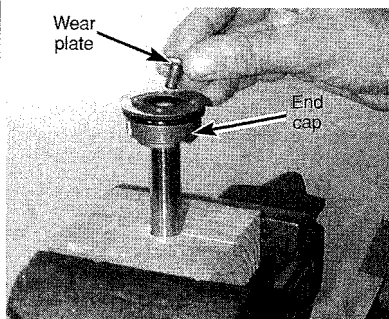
Slide the end cap onto the trim rod and thread the wear plate into the end of the rod
